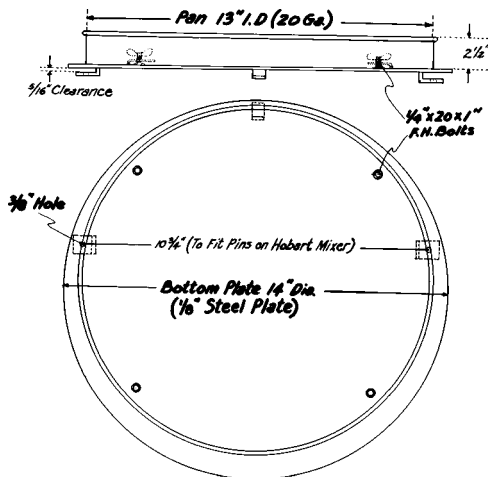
Diagram of Pan (dimensions shown are for the C-100 machine)
